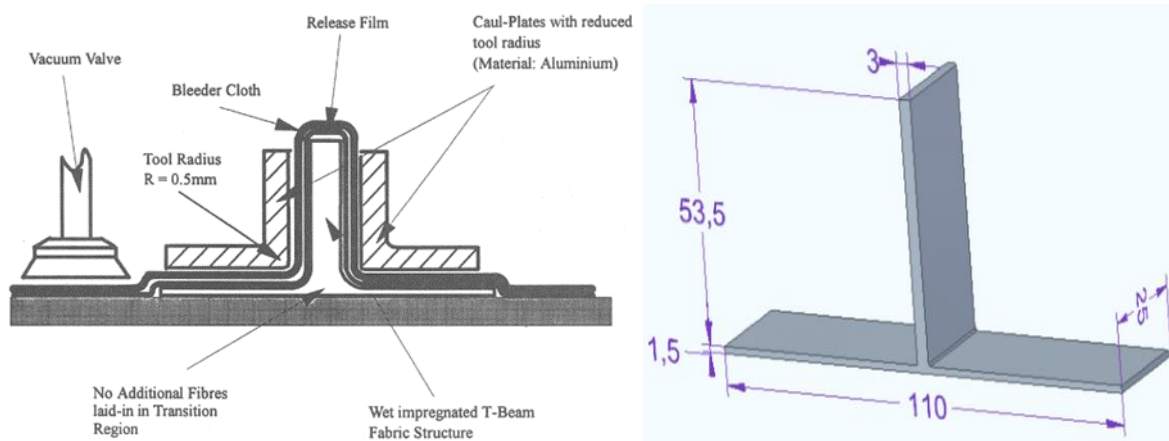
Tooling used to cure T-section specimens (McIlhagger, et al., 1995) and geometry of cut tensile specimens (right).
